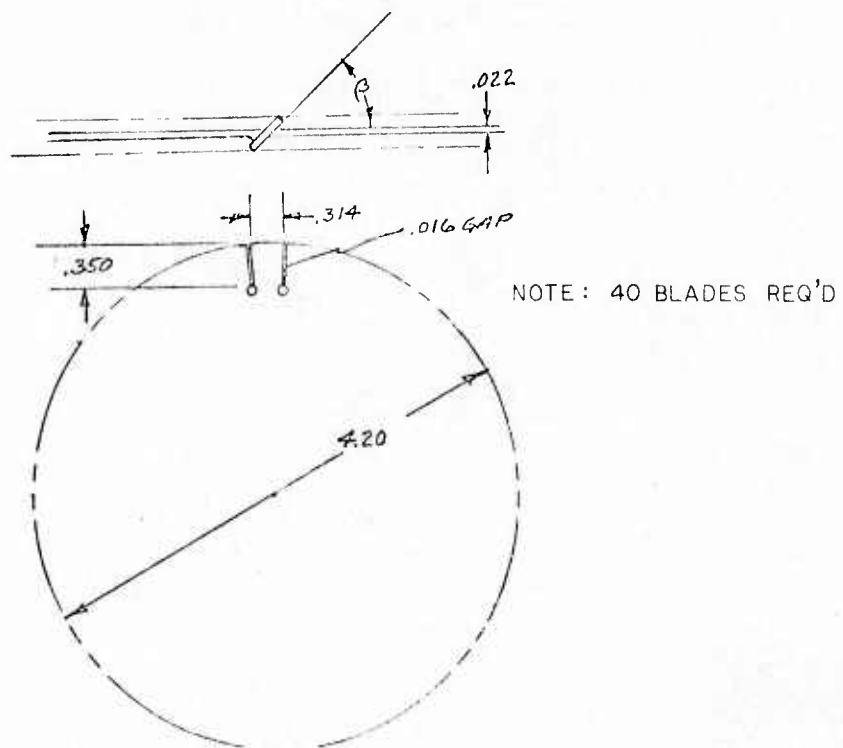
T2 Fin Support Ring and F2 - F6 Turbine Wheel Design
